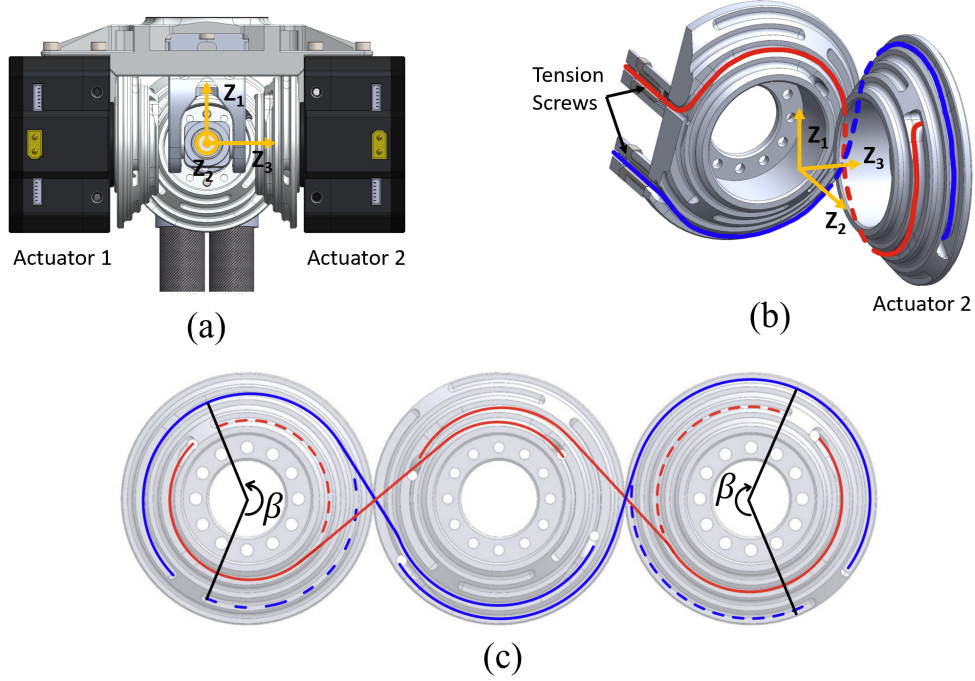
The modified hip design with cable-driven system: (a) Spherical hip joint. (b) Assembly of pulleys and cables, where the cables are pre-tensioned by screws. (c) Wiring diagram of the 2-DoF cable-driven differential pulley system, where β denotes the effective rotational range of the pulley, corresponding to the hip roll motion's range.
